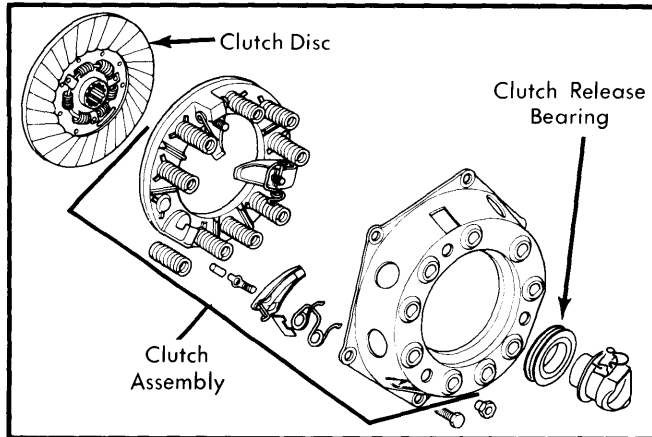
Exploded View of Chrysler Corp. Borg and Beck Type Clutch Assembly
